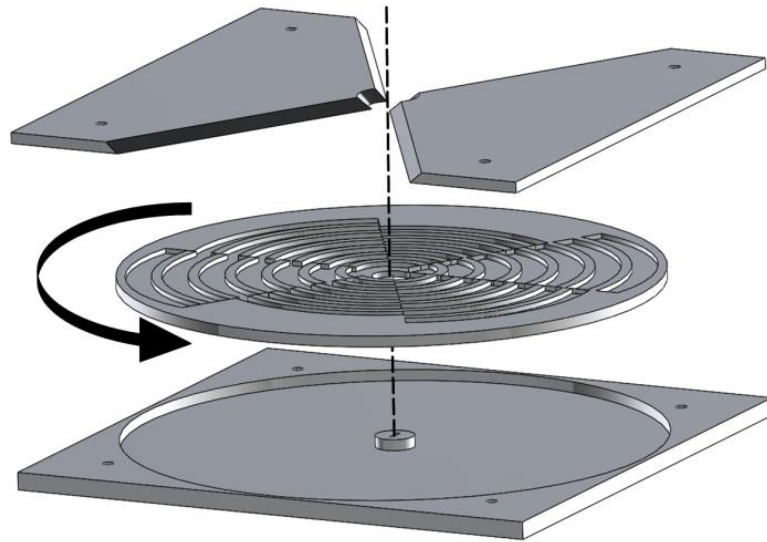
Exploded view of the 6-sector mechanical shift antenna with rotating plate.
